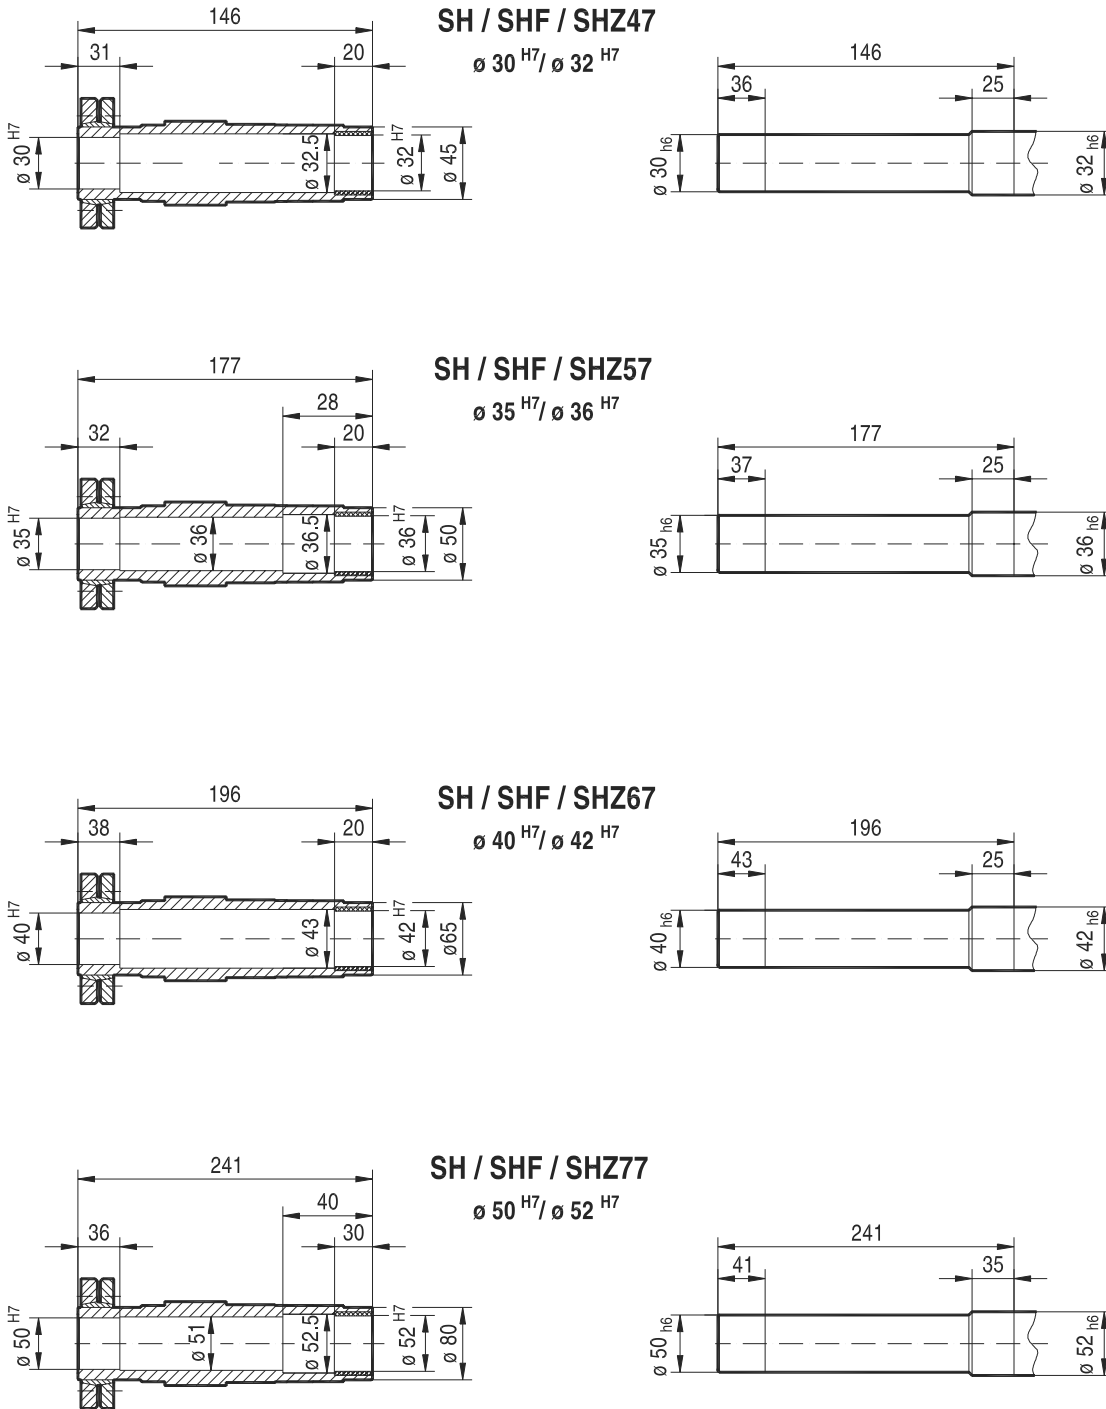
Shouldered hollow shaft SH/SHF/SHZ47...77
